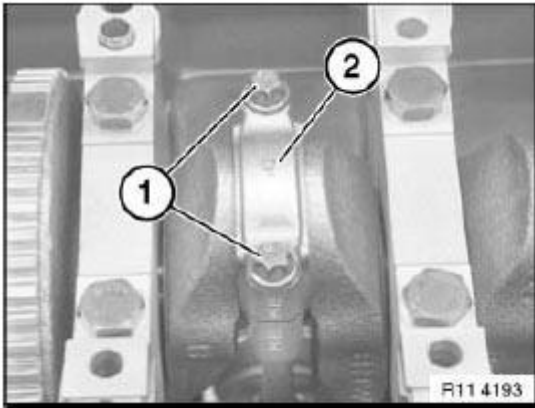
Identifying Connecting Rod Bolts And Bearing Caps
